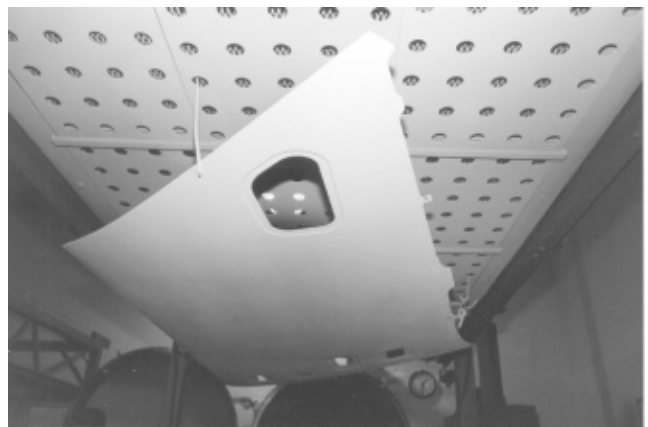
Fixed rack assembly (F-15 Wing Skin).
